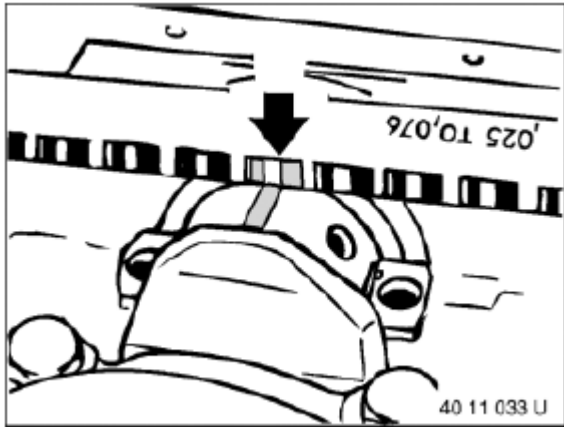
Reading Off Bearing Clearance At Width Of Crushed Plastic Thread With Aid Of Measuring Scale
